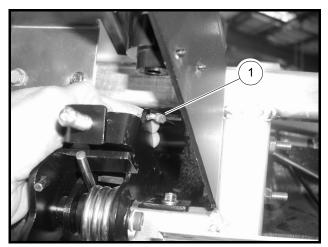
Z-Shaped Cable End – Gasoline Vehicles
